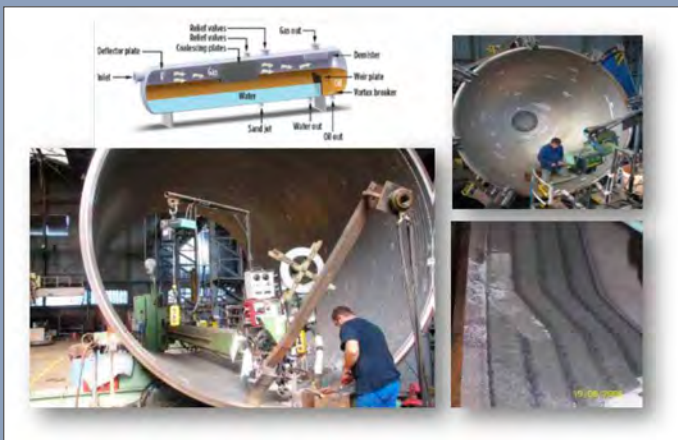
Strip cladding process. Base metal P500QL2, subsea separator, shell and dish-ends, using cladding material Alloy 625 (Soudotape 625 60x0.5mm and Flux Record EST 625-1)
